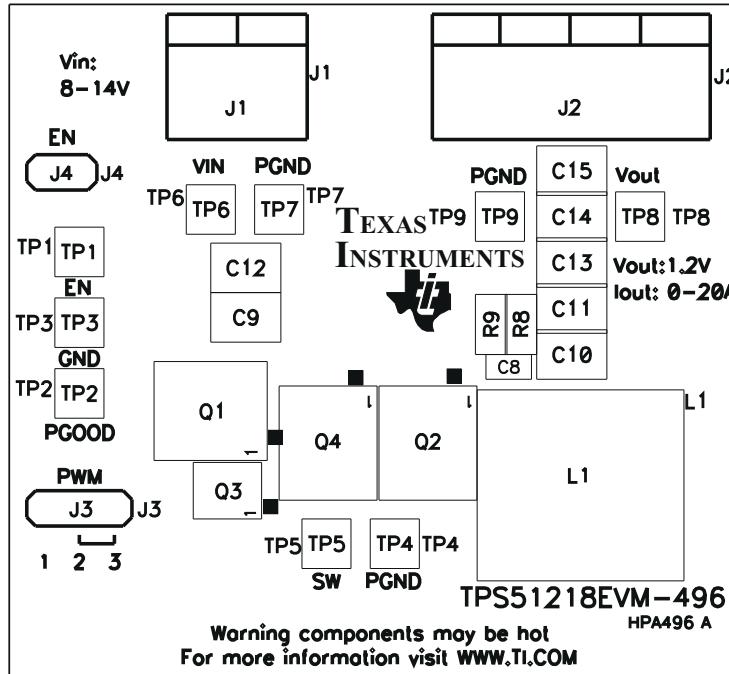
TPS51218EVM Top Layer Assembly Drawing, Top View
